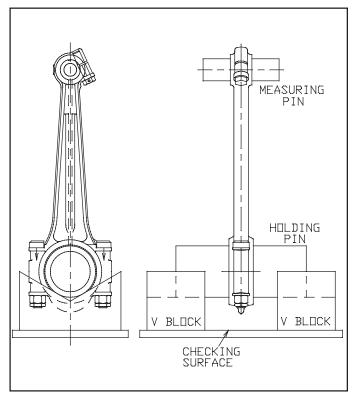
Connecting Rod Arrangement for Checking Alignment
